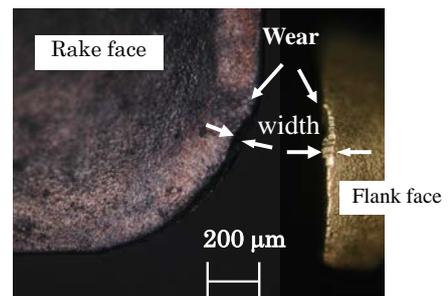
Tool wear and its measurement (50 m/min, cutting length: 3750 mm)
